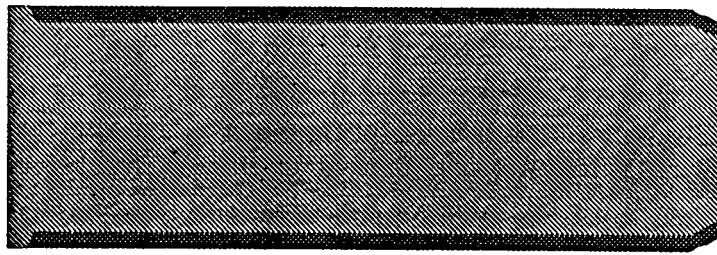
UNDERCUT DESIGN WITH CHAMFER
